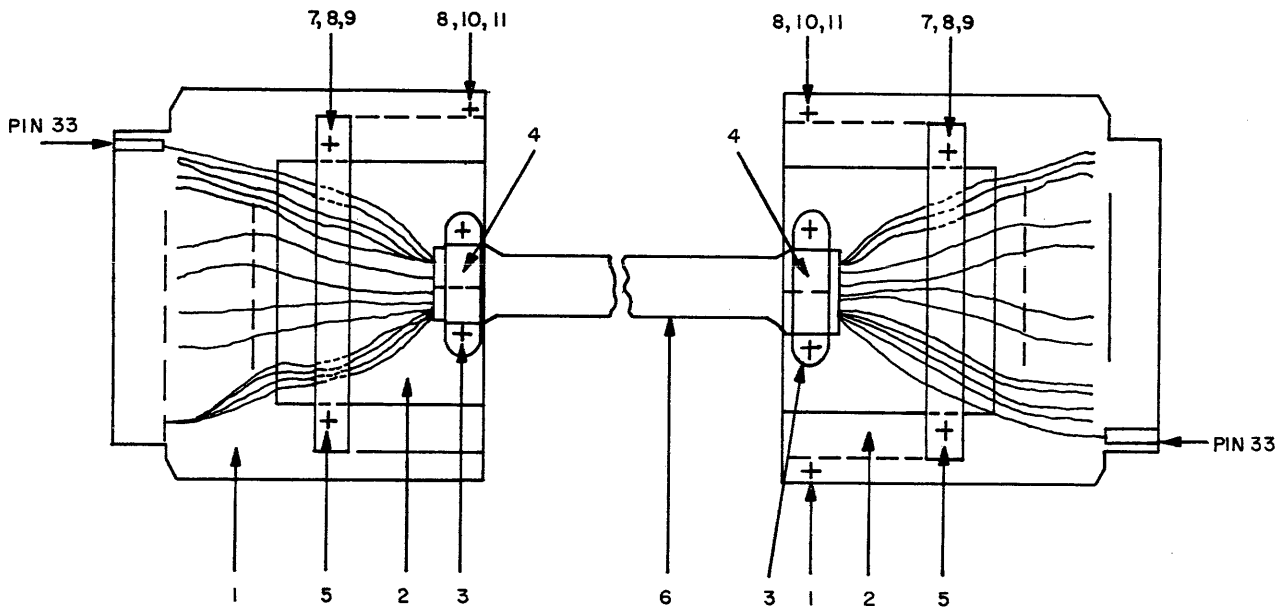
Cable Assembly, Special Purpose, μ -PAC to μ -PAC, for Types 316-01, 316-0100, and 316-0110 (Drawing No. A70032670 Rev C)
